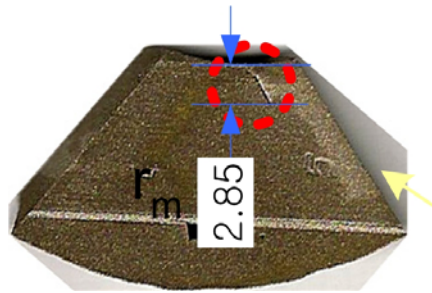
Flaw #5 Surface Crack of Pipe I.D.
